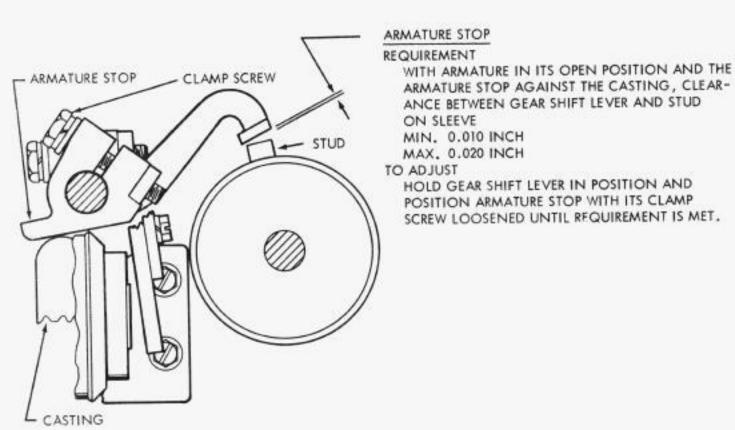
REMOTE CONTROL GEAR SHIFT MECHANISM
